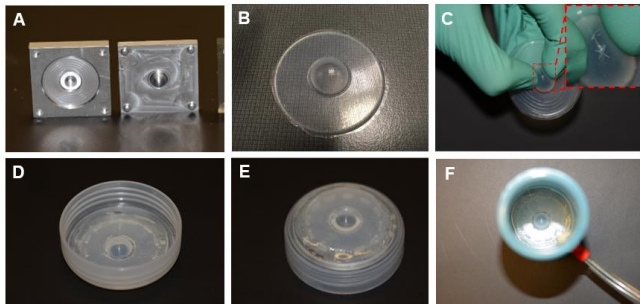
Fabrication of the venting valve. (A) Aluminum molds. (B) Synthesized valve by curing LSR. (C) Making crosscut on hemispherical part of the valve. (D) Top view of bonded valve to the bottom of the bottle. (E) Bottom view of bonded valve to the bottom of the bottle. (F) Bottle equipped with the valve and sensor tubing.
